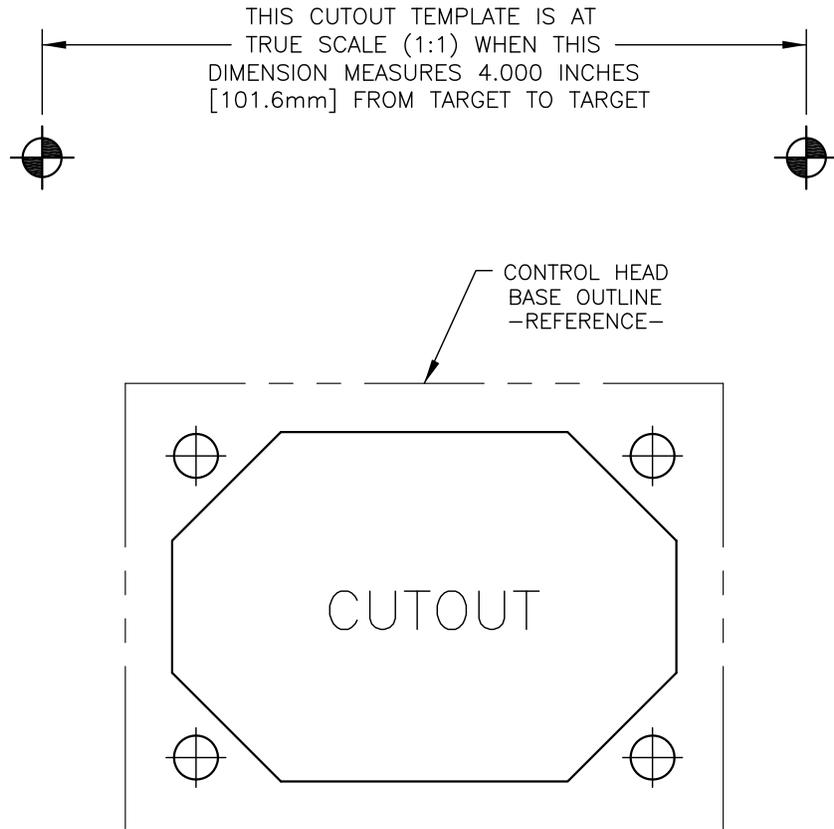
Control Head Mounting Holes and Cutout – Dwg #13293
